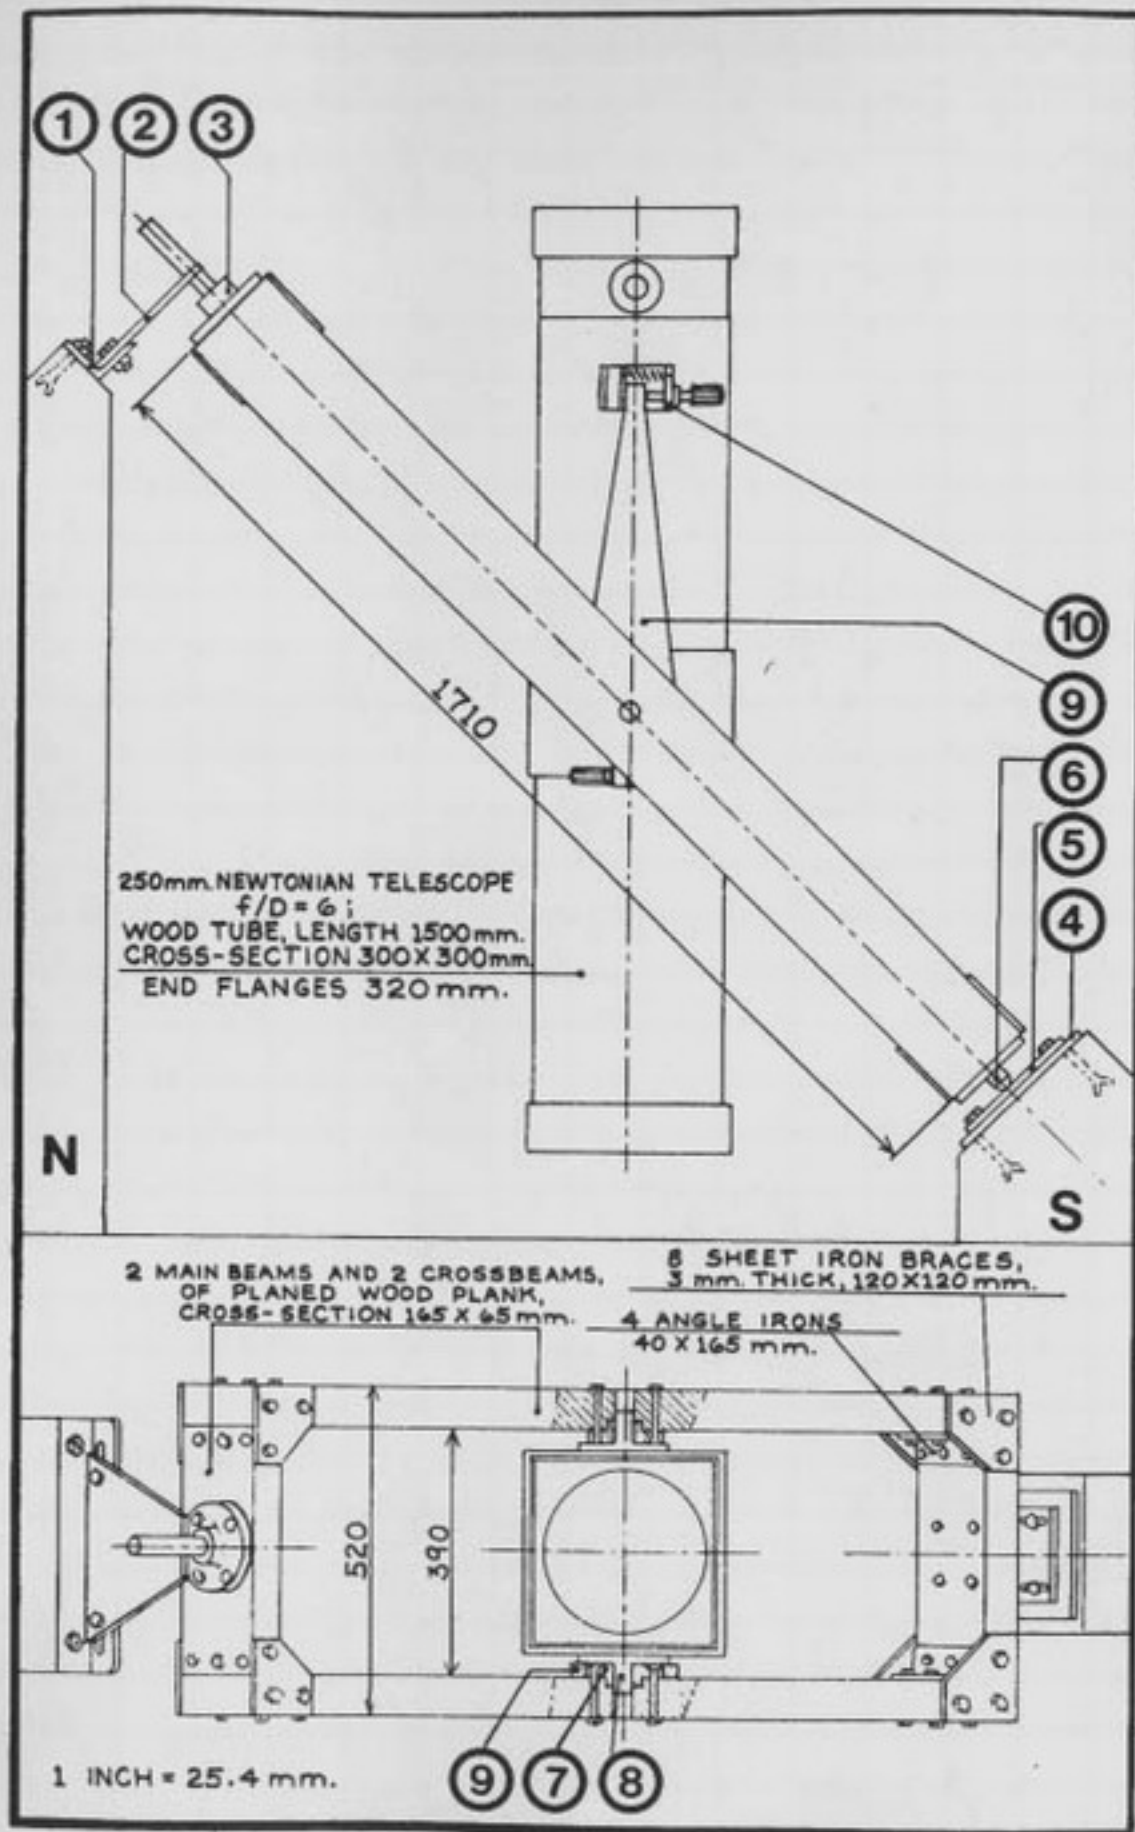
Simple cradle mount assembly for a 250mm (10-inch) telescope.
